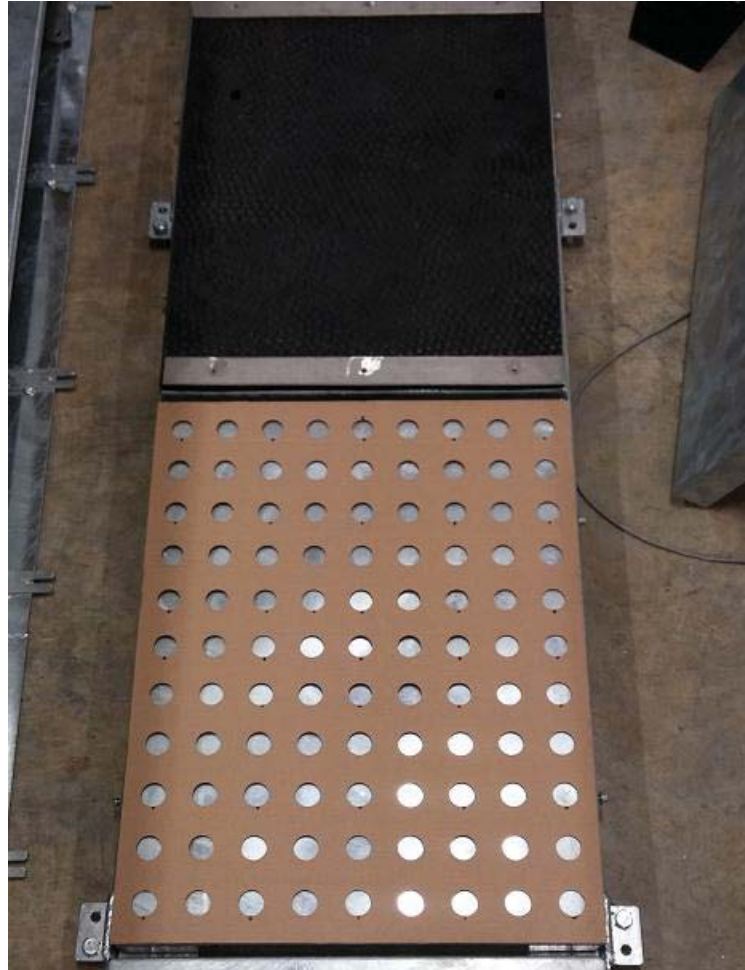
Laser Cut Jig to Test Accuracy of Sections
